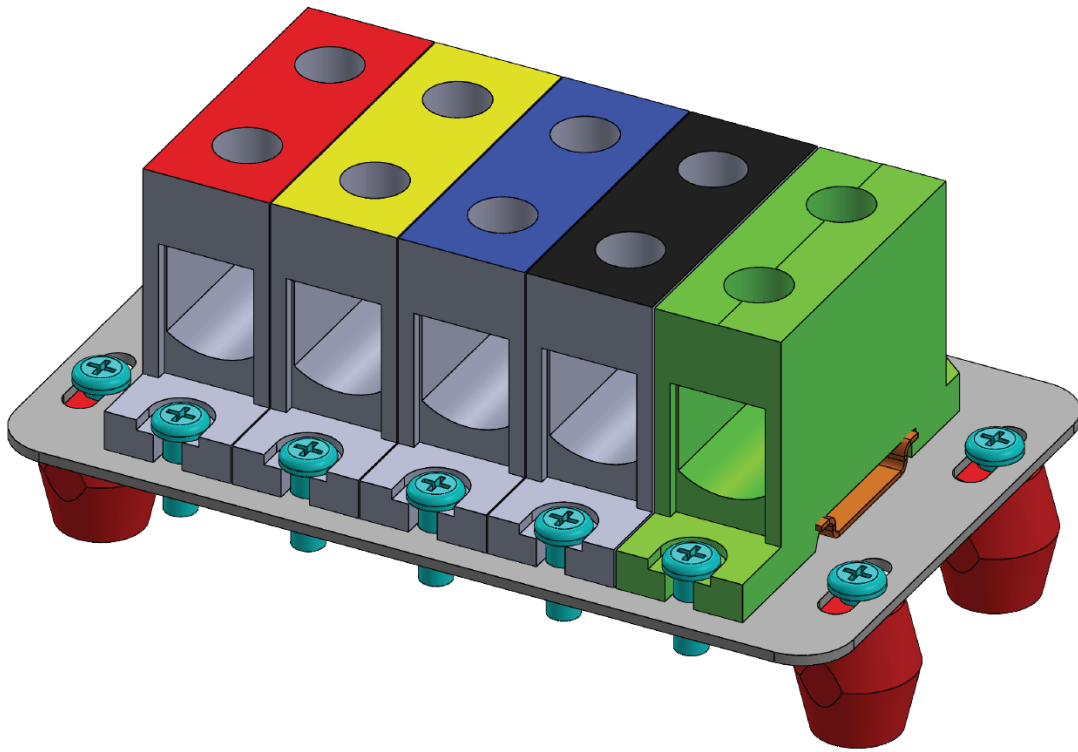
Detail Drawing of Incoming (SEC) Terminal Block 2.0 mm Stainless Steel Mounting Plate for Single-Meterbox with Steel Enclosure
